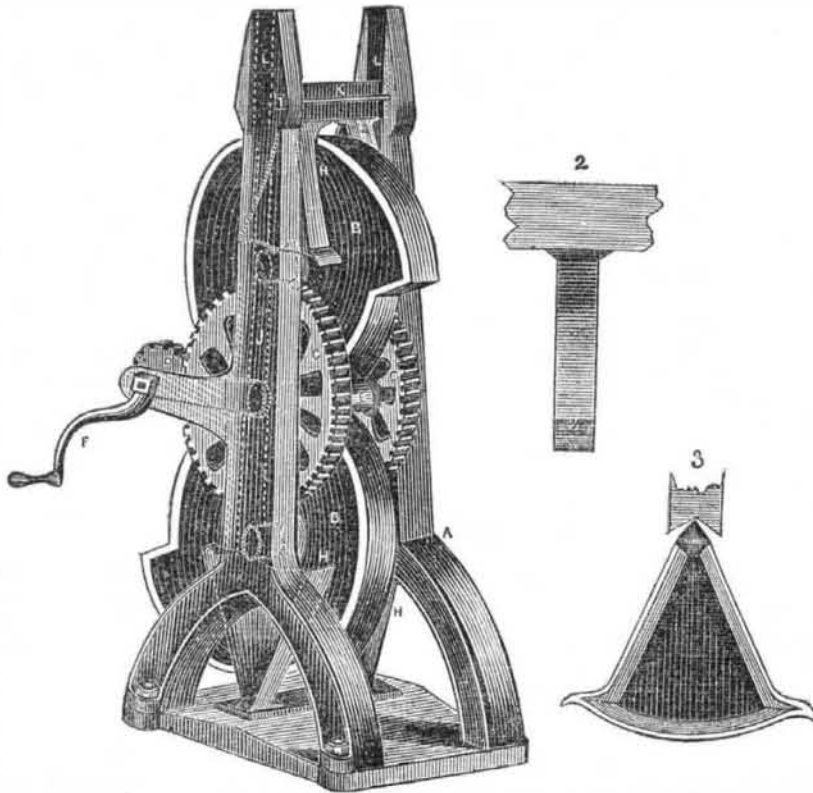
is a perspective view; fig. 2 is a side view of the sector, fig. 3. All the sectors are formed alike, but reversed in position—the upper and lower. A is the upright frame or standards; B B are two partial rotating cams. C C are two cog-wheels on the axle, E. This axle is allowed to move slightly up in its bearings; D is a pinion on a fixed axis, it is operated by the crank handle, F. A pinion and lever are employed, as required, on each side; H H are sectors (four), one on each side of the cams, B B. They are formed as represented by fig. 3, which represents the position of the top one; the lower ones are in a reverse position, viz., resting on their apex. The axle of the lower cam, B, rests on curved surfaces of the lower sectors, and the axle of the upper cam presses on the curves of the upper sectors. The axle of the upper cam moves upward in its side bearings, and the upper sectors are pressed upward, pushing up the plate or frame, R, which moves upward in the guide slots, L L, to press any thing that may be placed on
